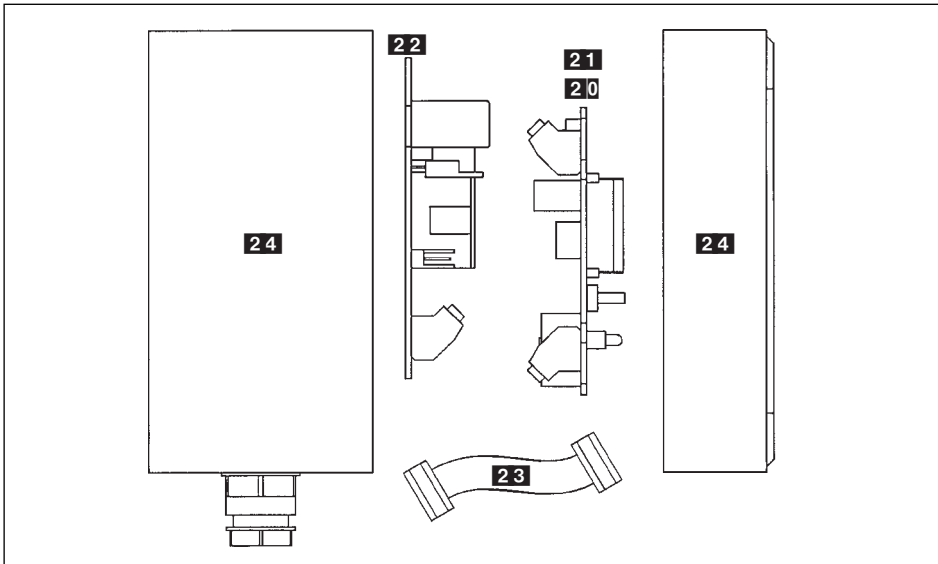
Spare Parts Explosion Drawing 8025 Wall-mount Version
